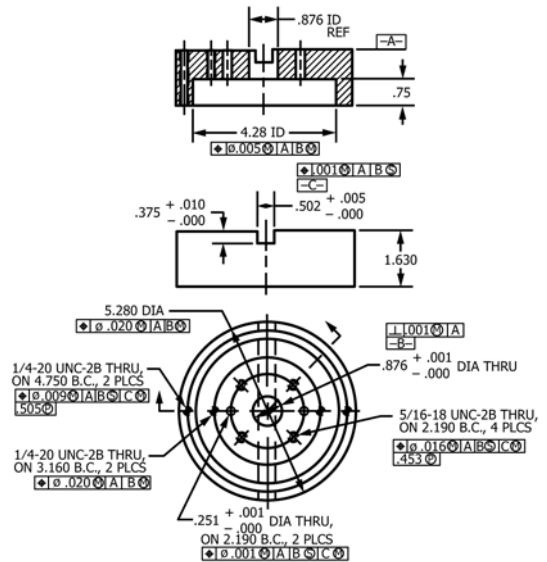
The Outer Shell of the Tension Fixture in English Units
